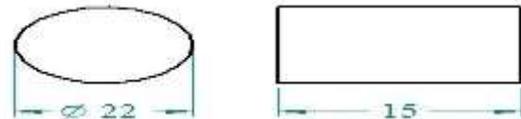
Hardness Test Specimens and dimension (ASTM E18)
